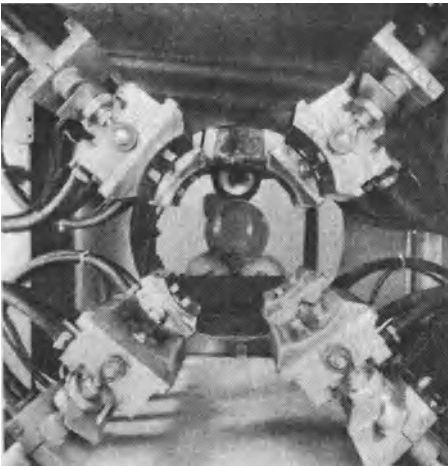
Tube tester with 2×4 probe boxes around the tube circumference with spiral transport (design Krautkrämer)
